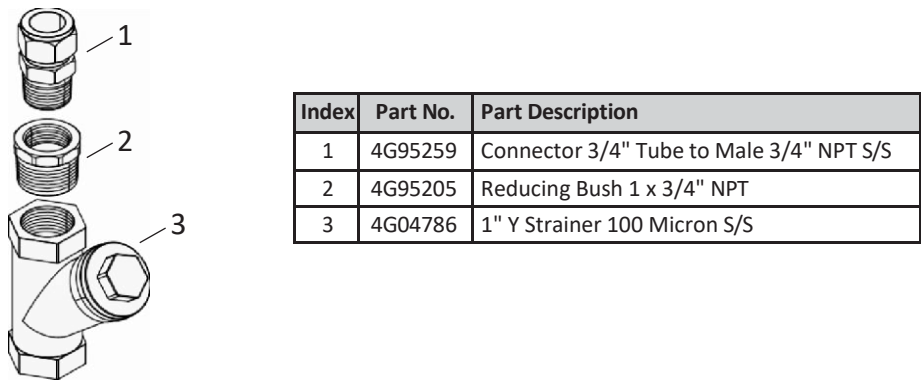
DEF2 Strainer Assembly (Part # 2A101006)
